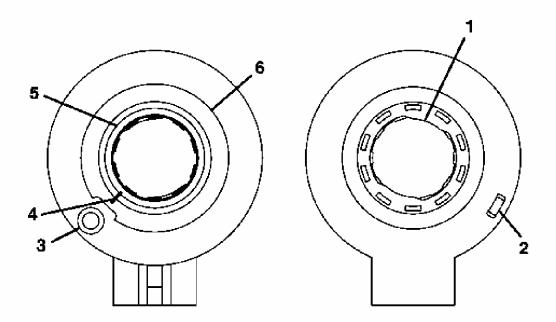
Identifying Steering Wheel Position Sensor Double D Flats Courtesy of GENERAL MOTORS CORP.
